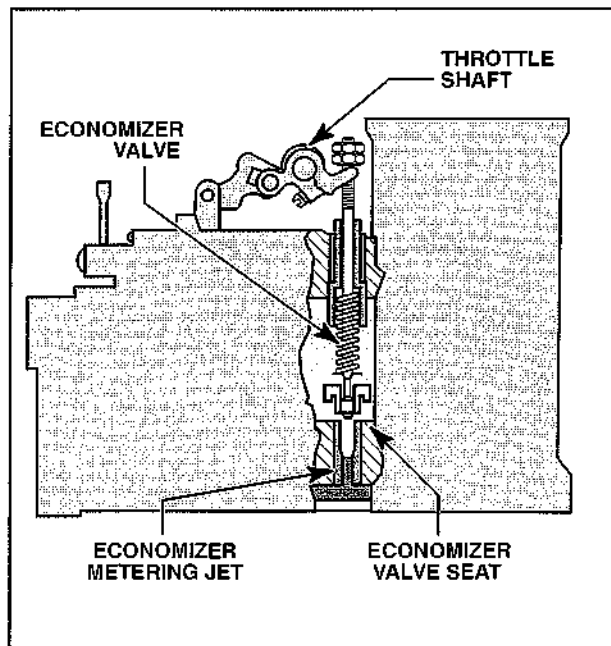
A needle-type economizer admits additional fuel through the economizer metering jet when the needle valve is pulled off its seat at full throttle settings.
